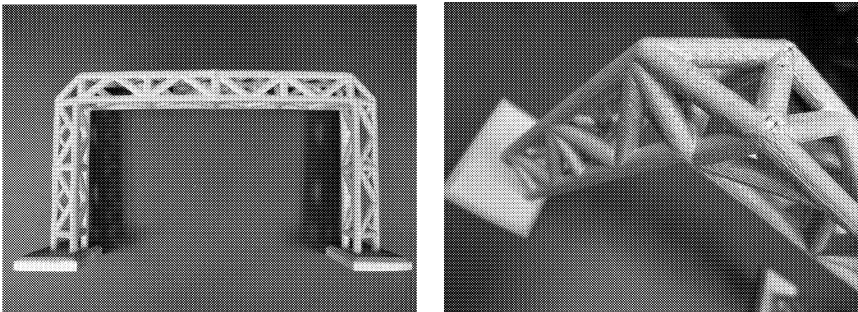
Truss structure produced by investment casting using an ABS polymer, 3D extrusion printed, expendable pattern.
